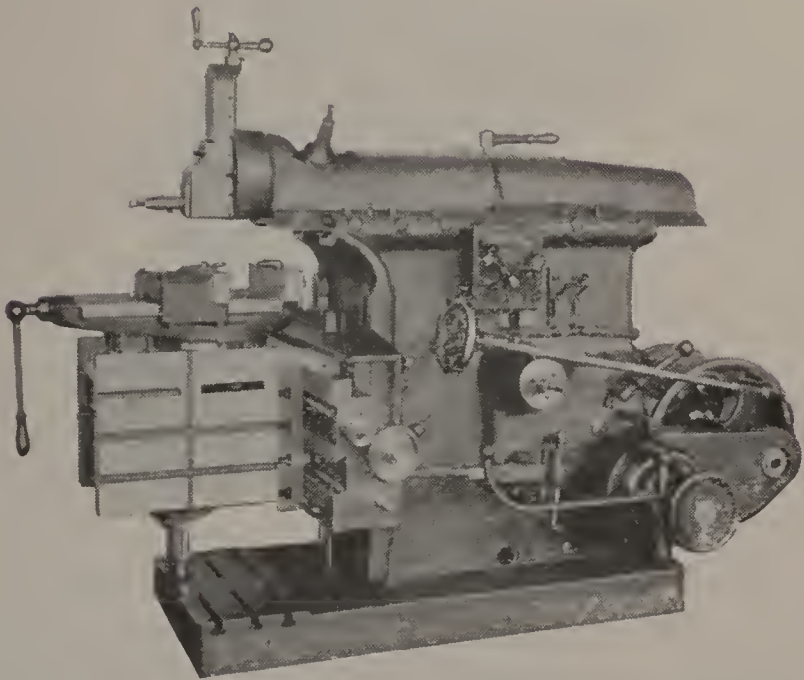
SHAPER, DRIVEN BY RELIANCE ADJUSTABLE SPEED MOTOR.
